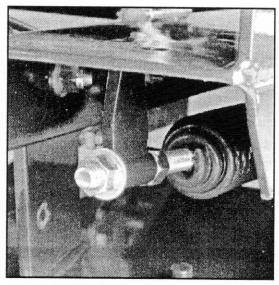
Older Sporter models have a nut similar to this, new models have a hand crank. Bot units are adjusted and removed in the same manner.
